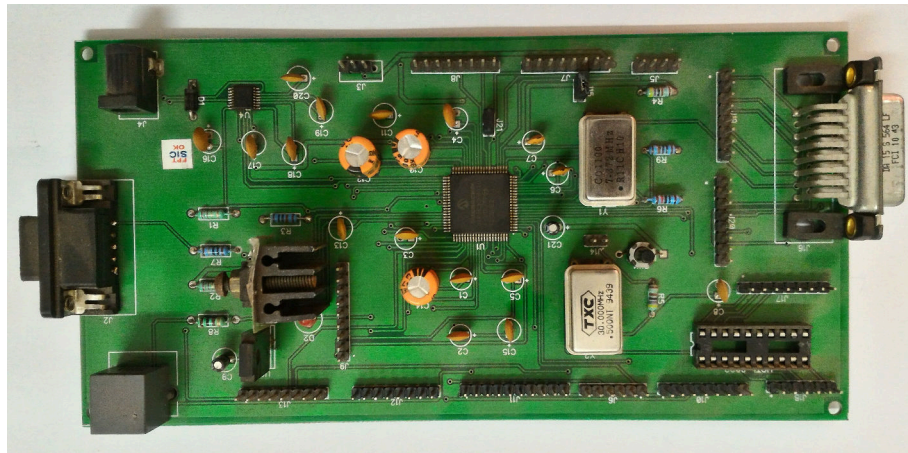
dsPIC30F6010A Microcontroller based controller board developed for testing Axial Flux motor and ETEL motor.
